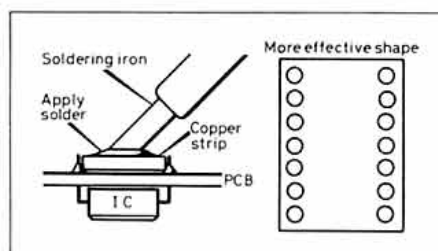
Using a piece of copper to unsolder all IC pins at once. The shape with the holes fitting over the pins is more effective.
